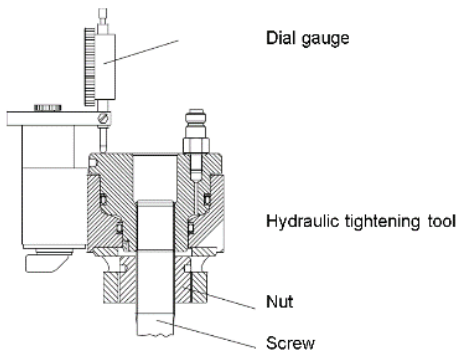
Measuring tool, 1 pc hydraulic jack will be needed.
